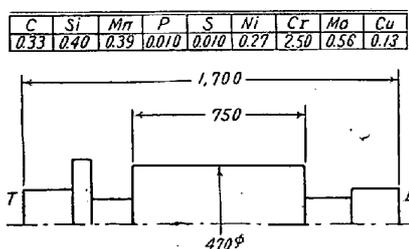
Outline drawing the 1st pinion of the L.P. steel.
